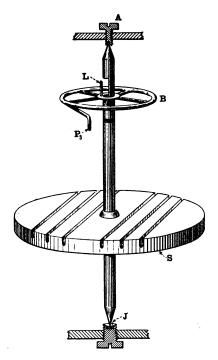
SKETCH OF BALANCE-WHEEL SPINDLE.
